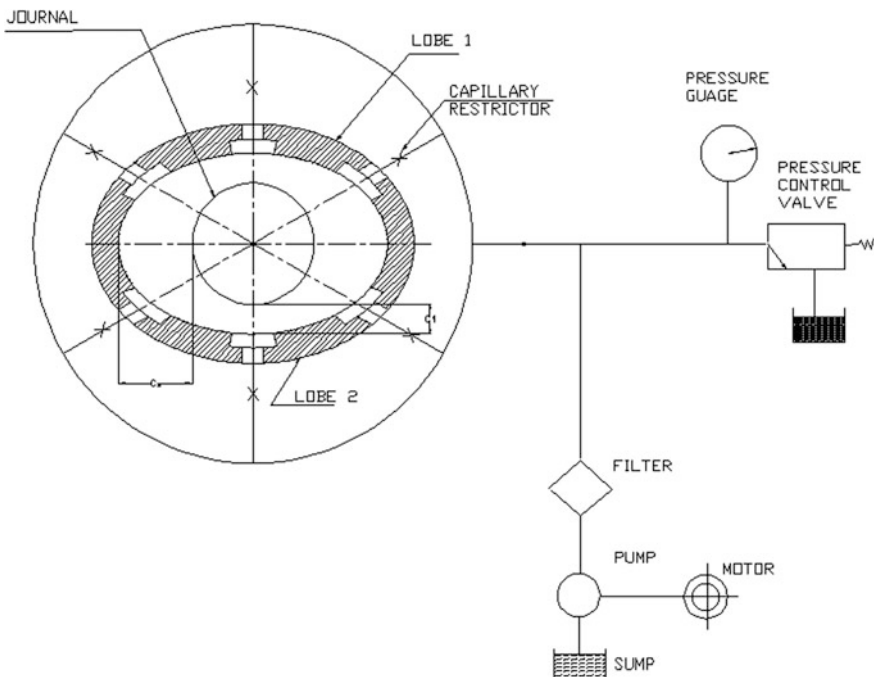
A two-lobe six-recess hydrostatic journal bearing [2]
